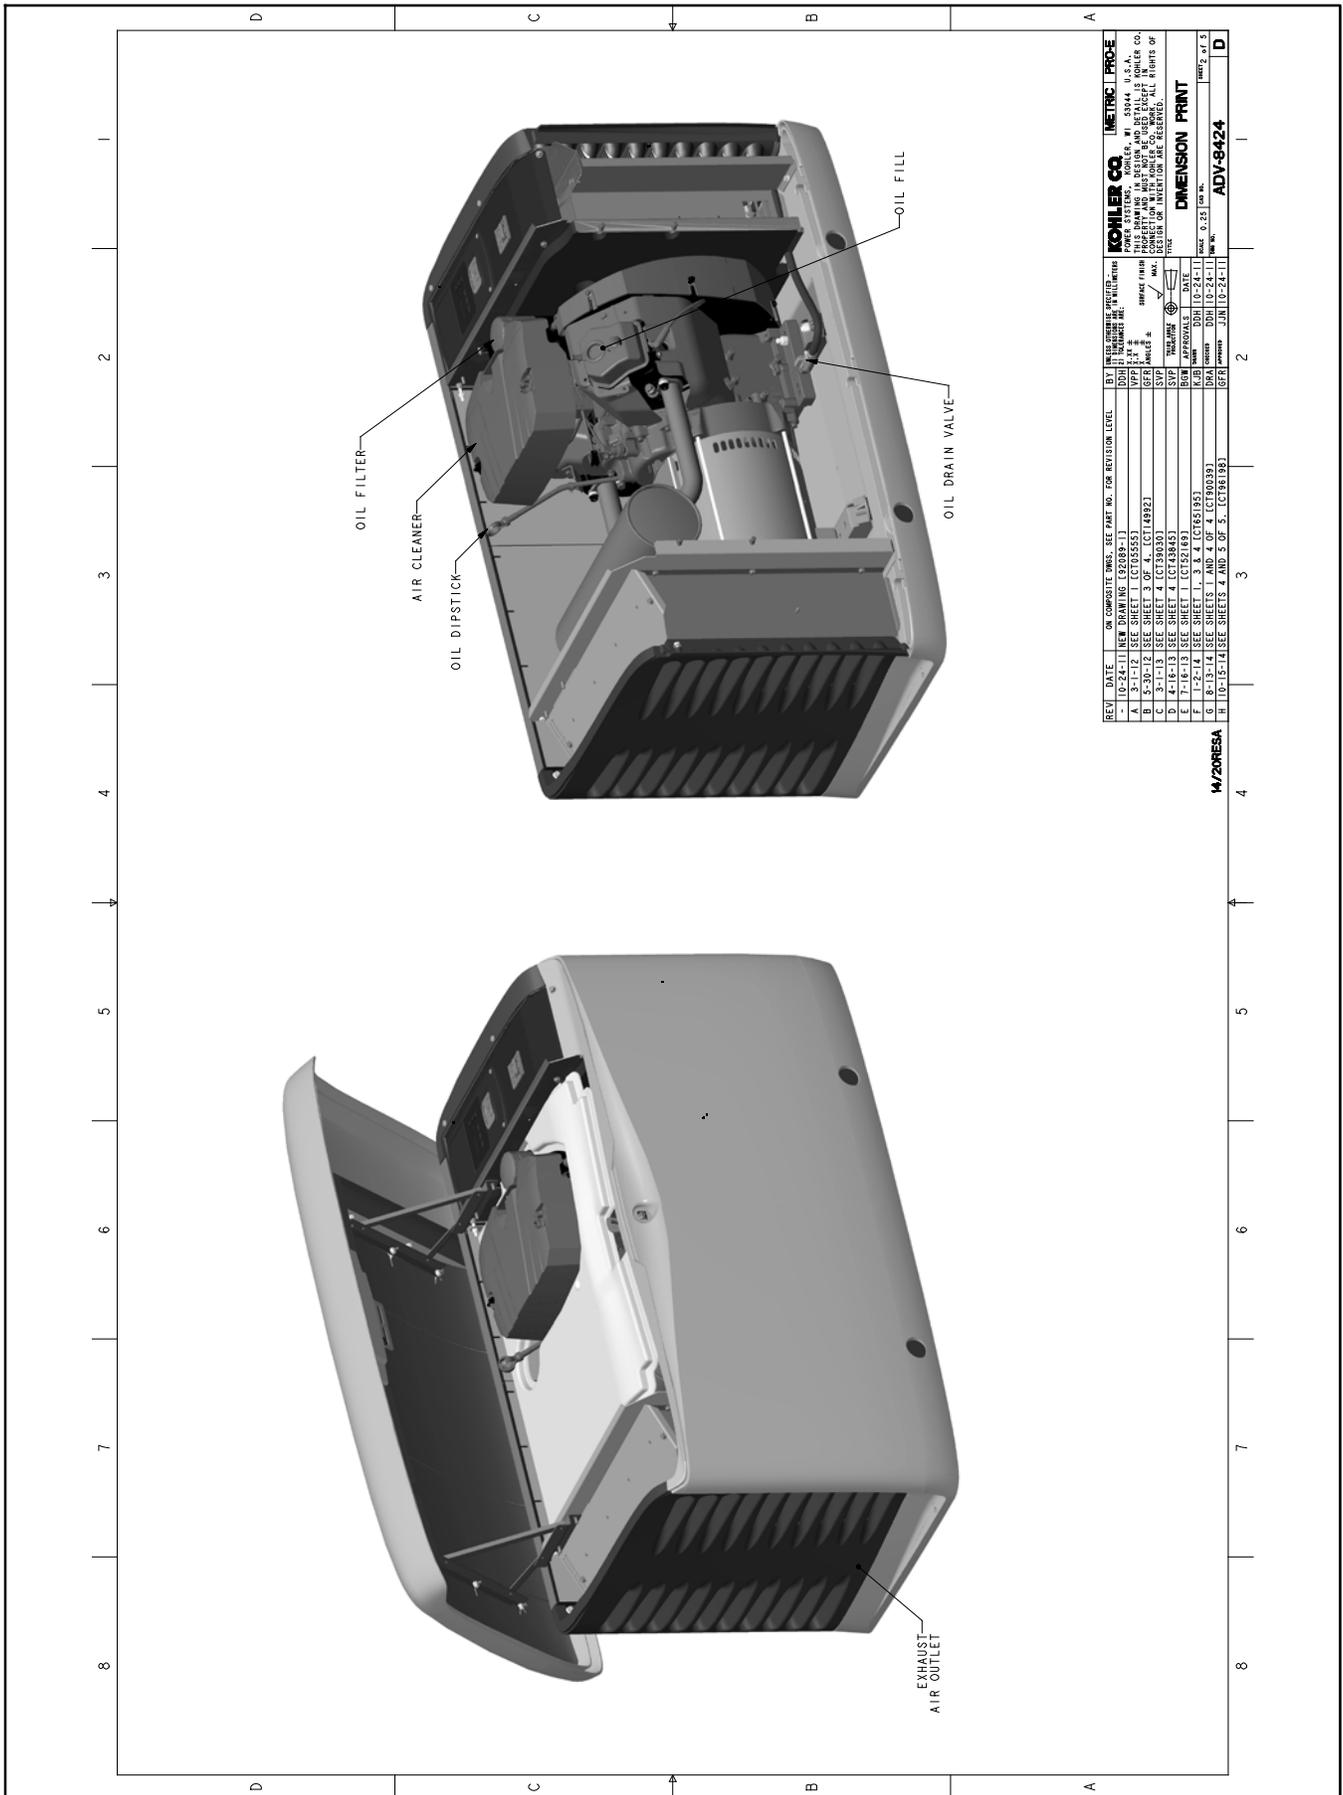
Dimension Drawing, 14/20RESA/RESAL, ADV-8424, Sheet 2 of 5
